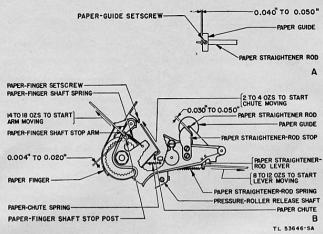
Paper chute, paper fingers, and paper straightener rod.
